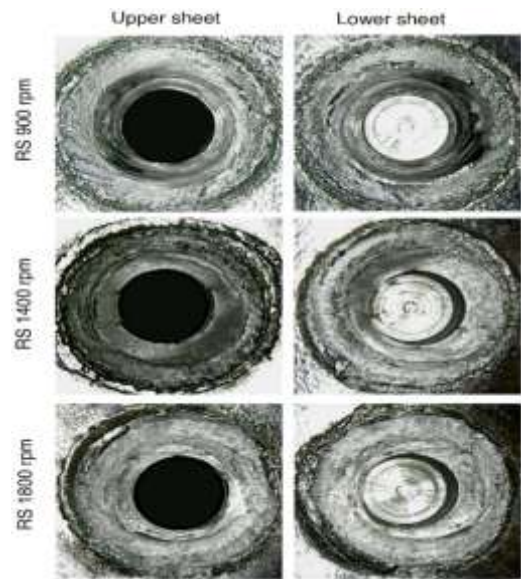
Fracture surfaces of FSSW joints under shear load using a cylindrical pin at different RS
